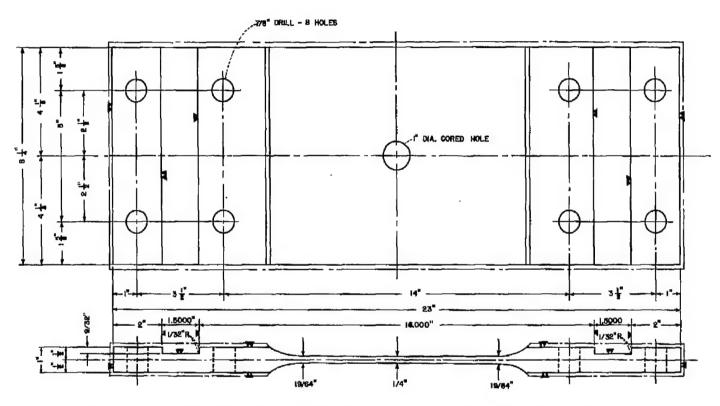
Plate-type fatigue specimen with 1-inch-diameter cored hole (type 1B). For specimen type 1B-1 hole was reamed to $1\frac{1}{16}$ -inch diameter.
